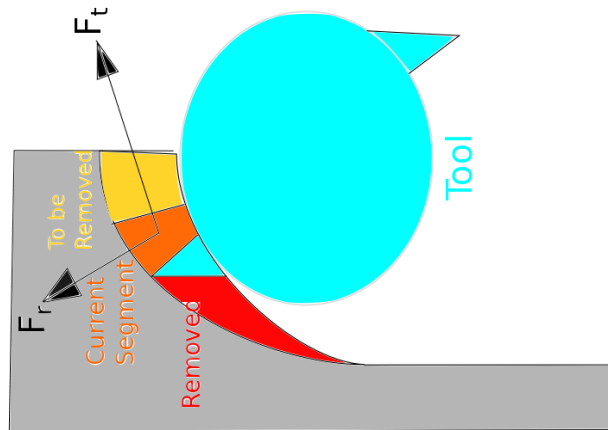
Illustration of how a tooth of a cutting tool makes contact with the workpiece material.
